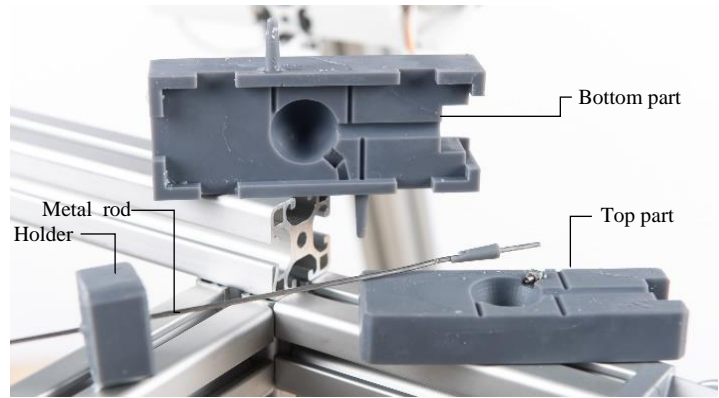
A custom-made mold is shown in this figure. The custom-made mold consists of three parts: the top and bottom of the mold and a metal rod with a holder. The hollow shape of the eyeballs is formed by removing the rod after filling the mold with silicone.
